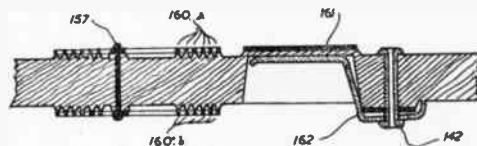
Section of moulded plate showing metal deposited on ridges and protuberances.
